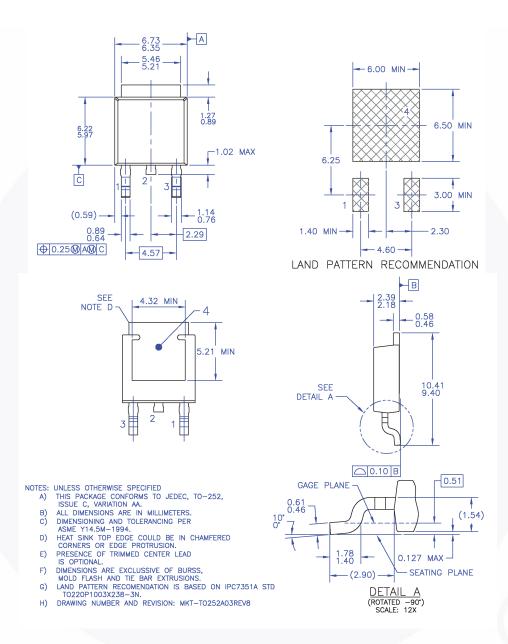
TO252 (D-PAK), Molded, 3-Lead, Option AA&AB
